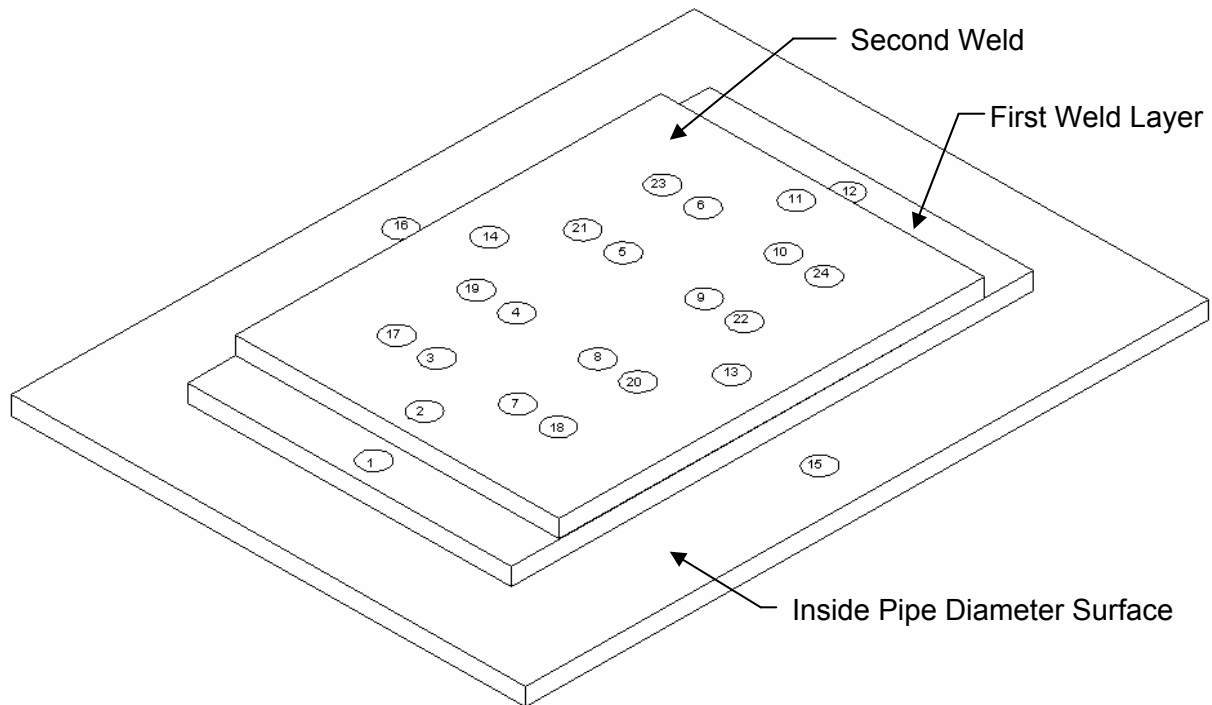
First Pass of Weld Layer 2 for Test 01
